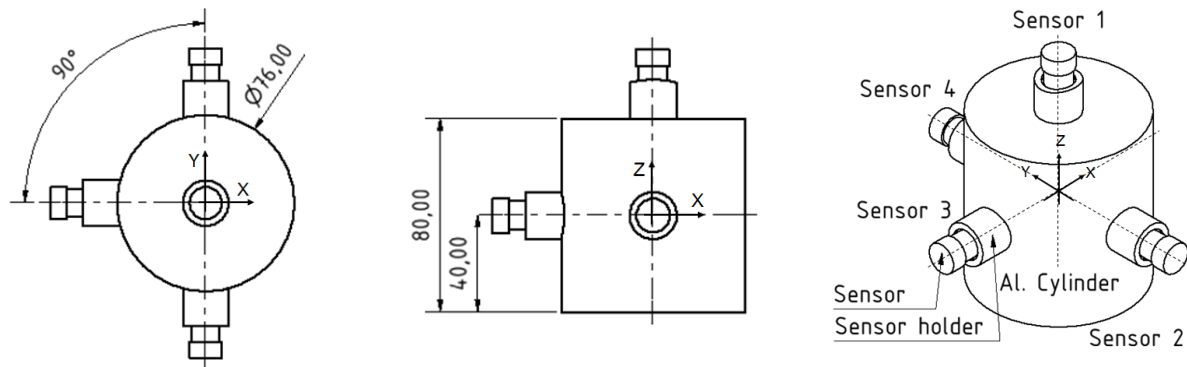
Cylindrical aluminum sample and sensor locations.
